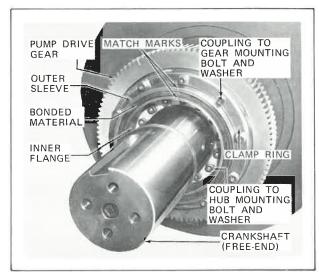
FRONT VIEW OF PUMP DRIVE GEAR ASSEMBLY.
